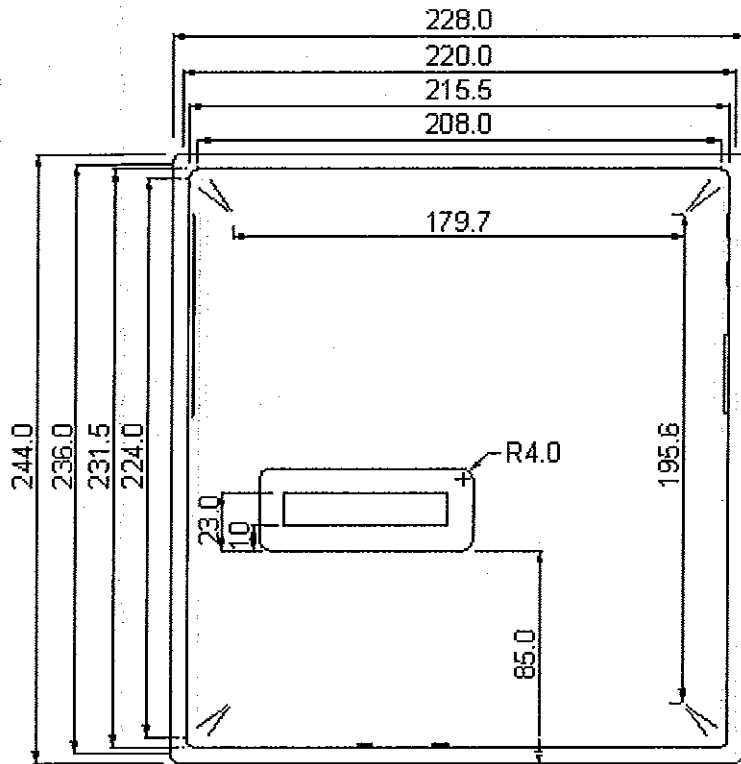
Figure I: Top view of the Vacuum Formed housing showing dimensions in mm.
